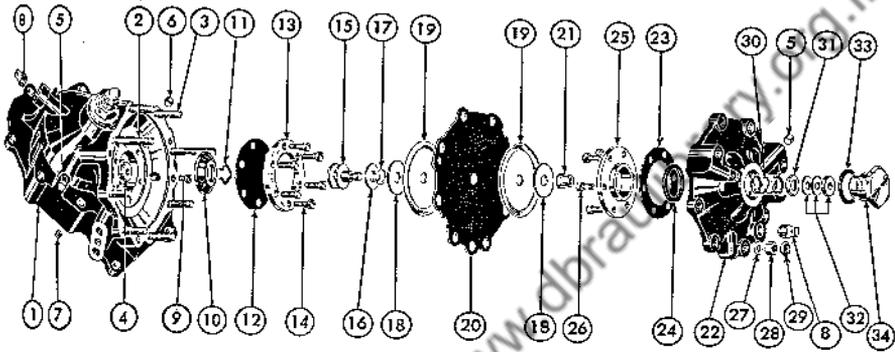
"EXPLODED" OF LOAD COMPENSATOR
